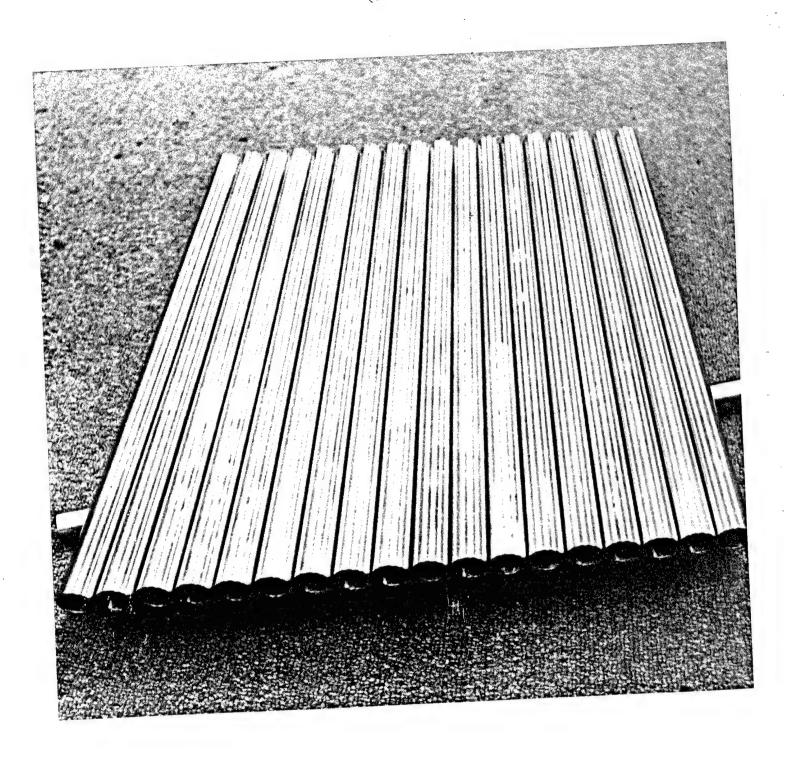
H-13 Steel Casings for Hybrid Track Pins.
